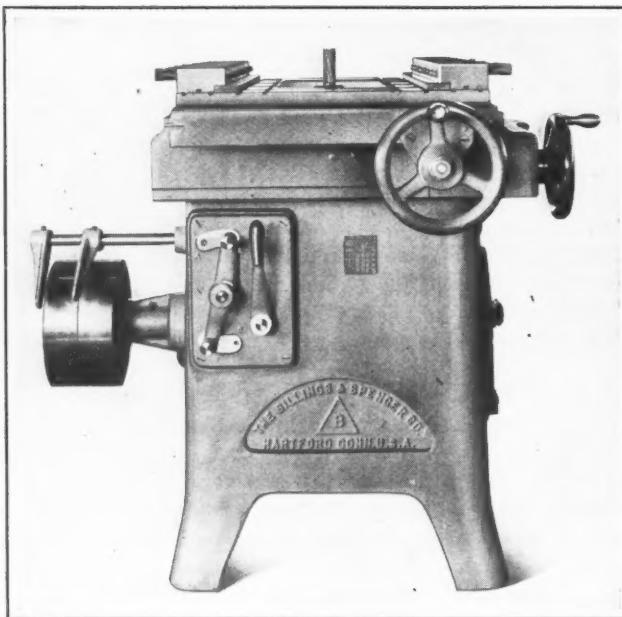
Machine for milling the outline of Blanking and Trimming Dies, which has been redesigned by the Billings & Spencer Co.
